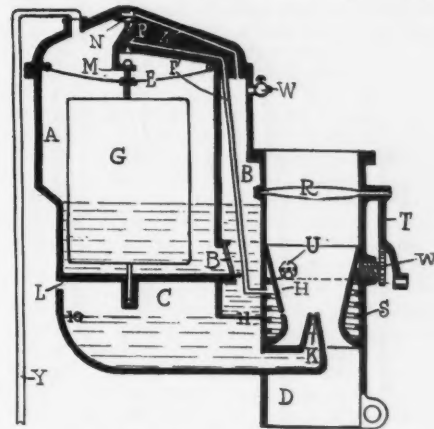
Sectional view of the Vacuum carburetor, showing the four compartments A, B, C and D
